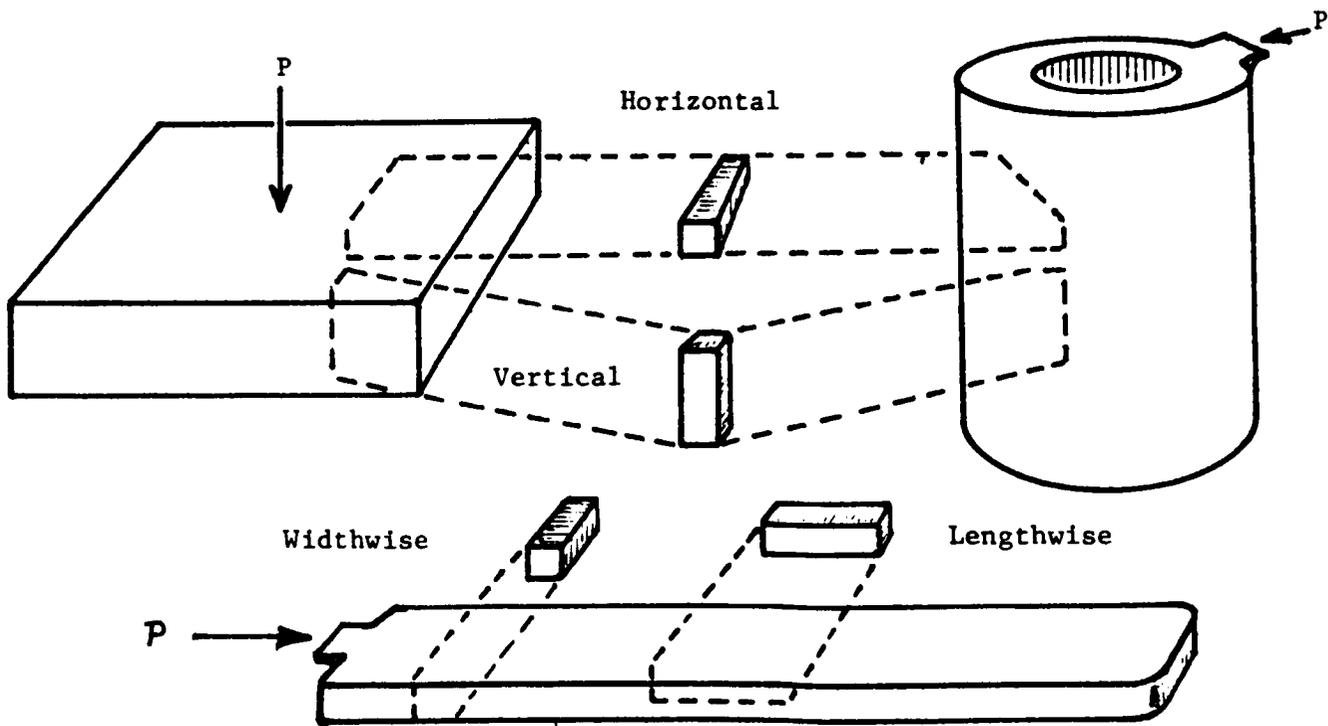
The three basic kinds of molded pieces from which test specimens were taken. "P" indicates the direction of applied pressure (compression molding) or the point of resin injection (transfer molding).
